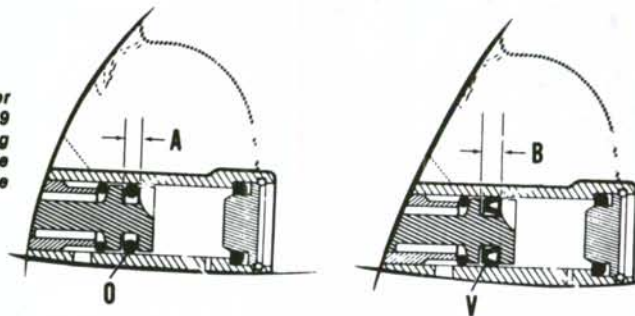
View showing installation of idle governor spring. Later McCulloch "W" series carburetors do not have governor spring. Adjust spring as shown so engine will idle smoothly in any position.
